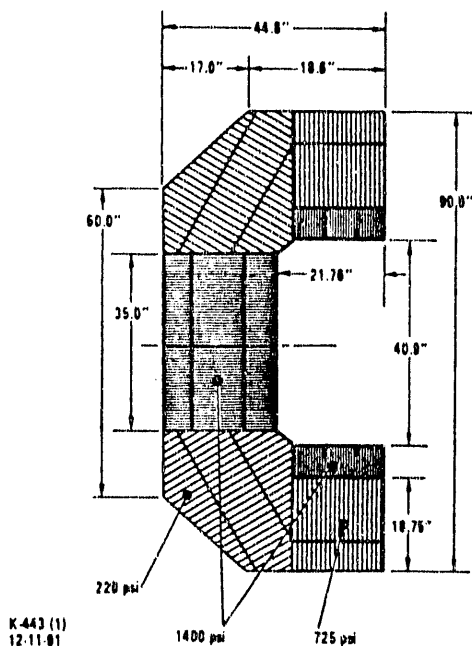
Impact Limiter Design, Cross Sectional View Showing Different Honeycomb Parts
